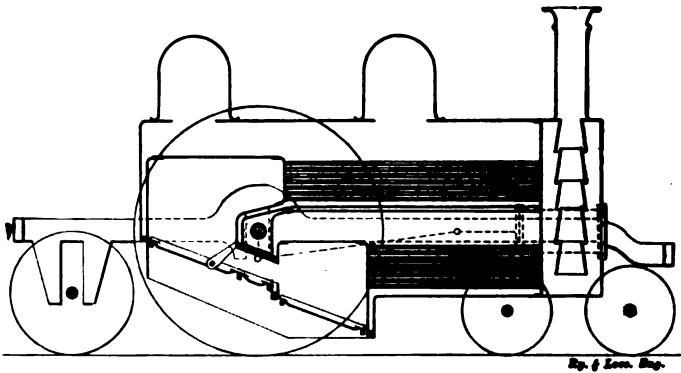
Colburn's Design of Locomotive Double Boilers, with Driving Axle Between
